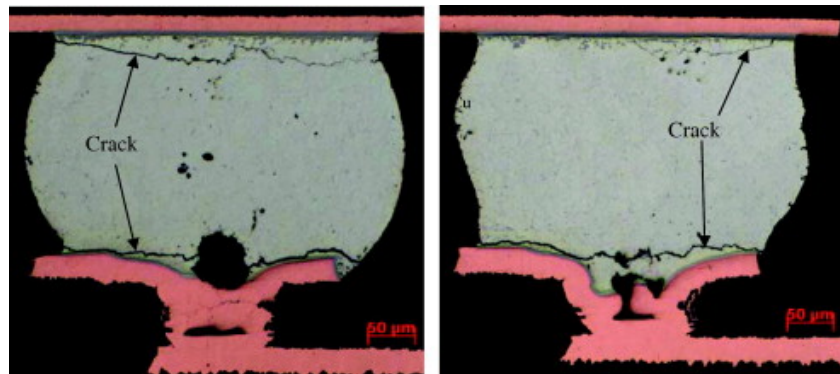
Cross sectional profile of the failed solder joints [3]
